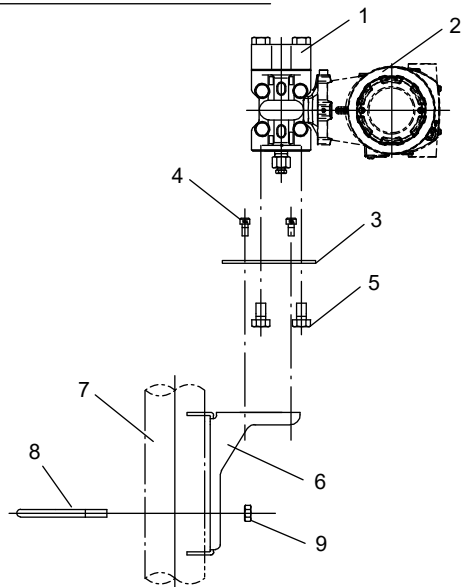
Transmitter Mounting (for Low Flow Measurement Vertical Impulse Piping Type)
